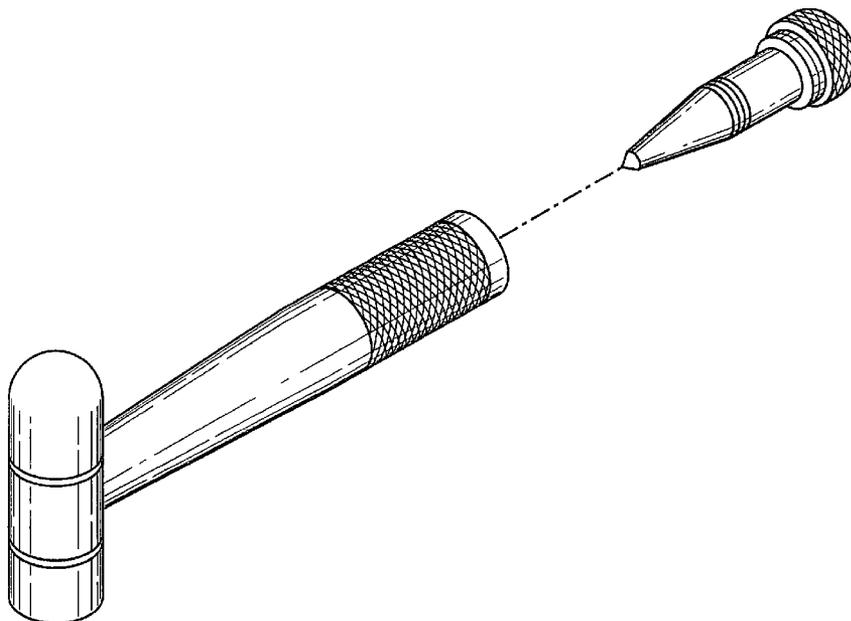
is a side elevation exploded view, showing the center punch unscrewed;
